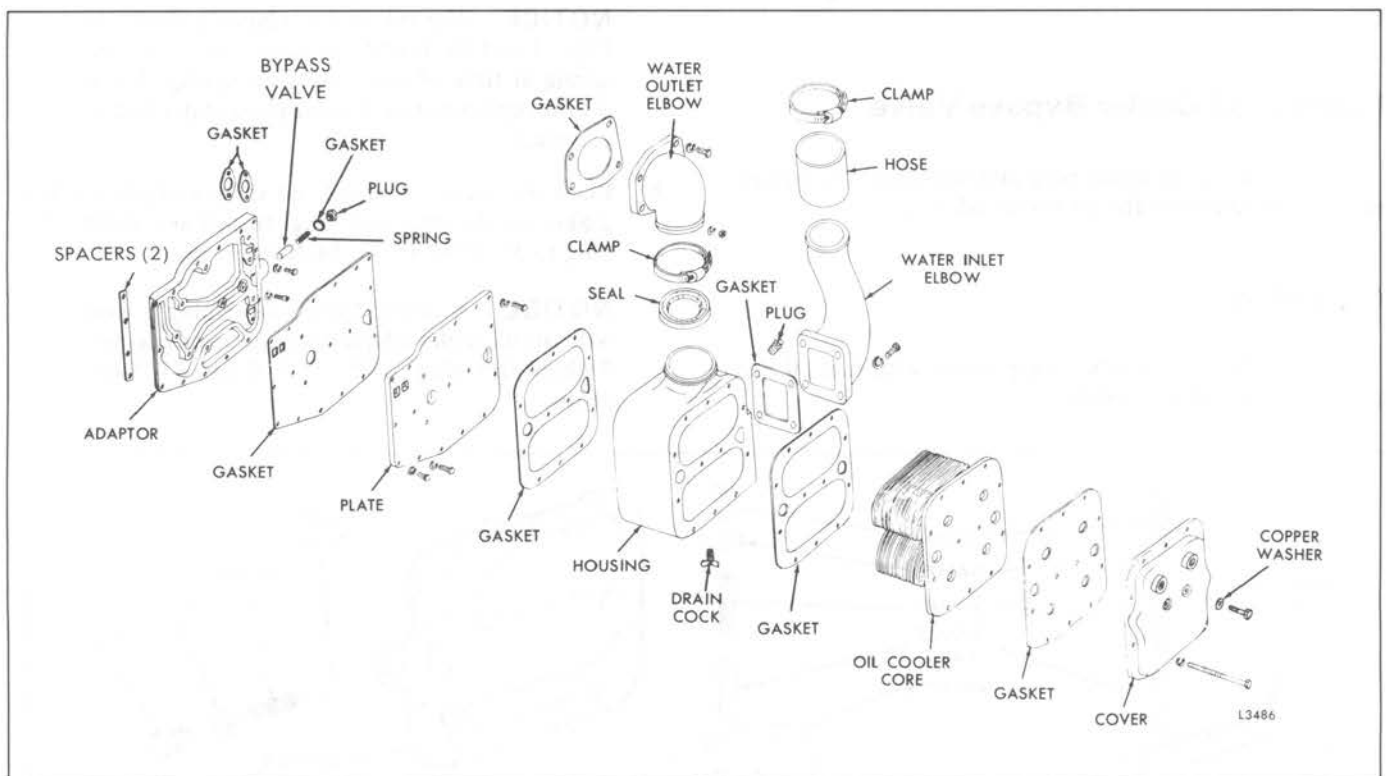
Twin Plate Oil Cooler Details and Relative Location of Parts
